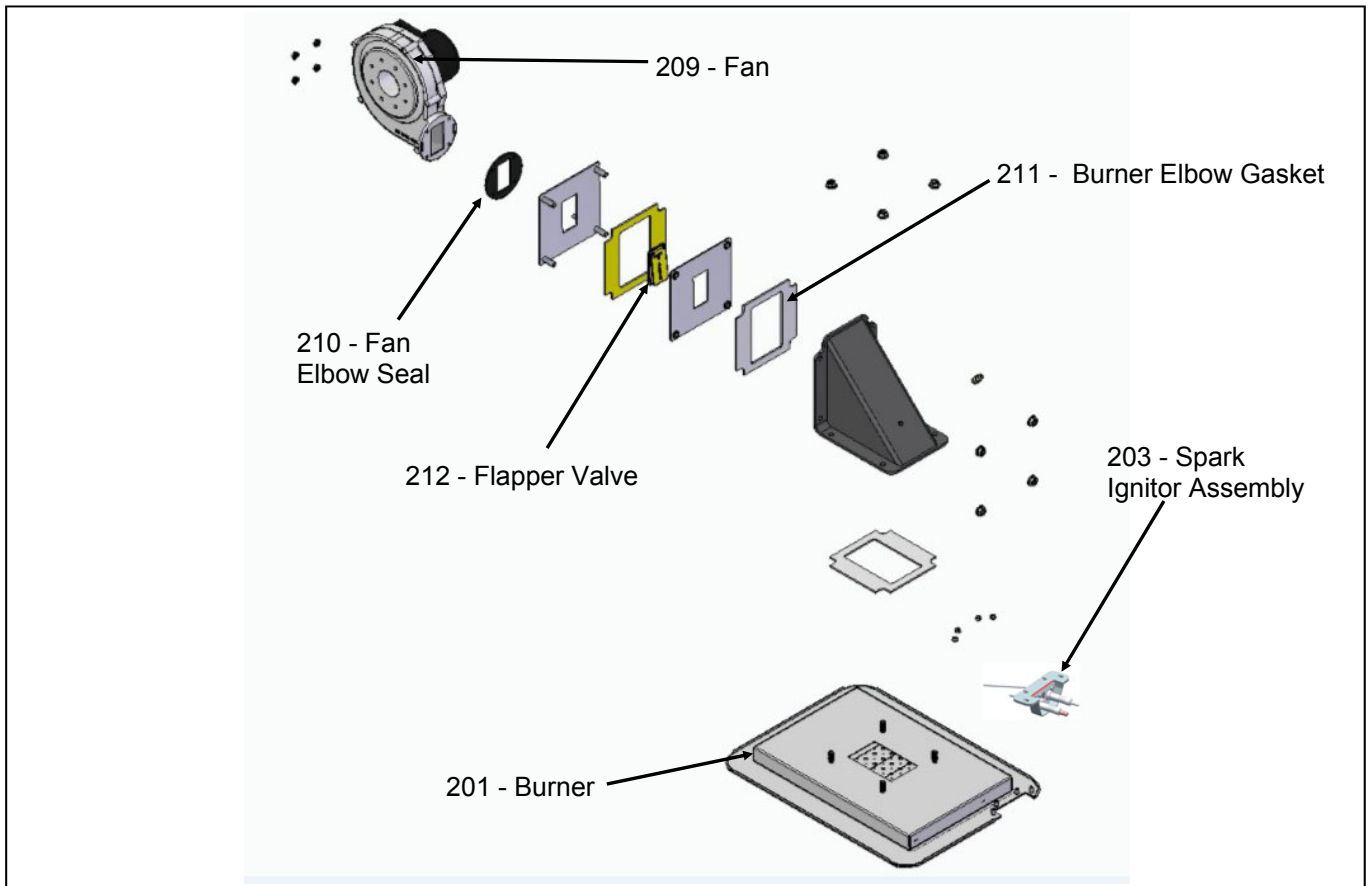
Combustion System Assembly PV70c/95c/110c/140c
